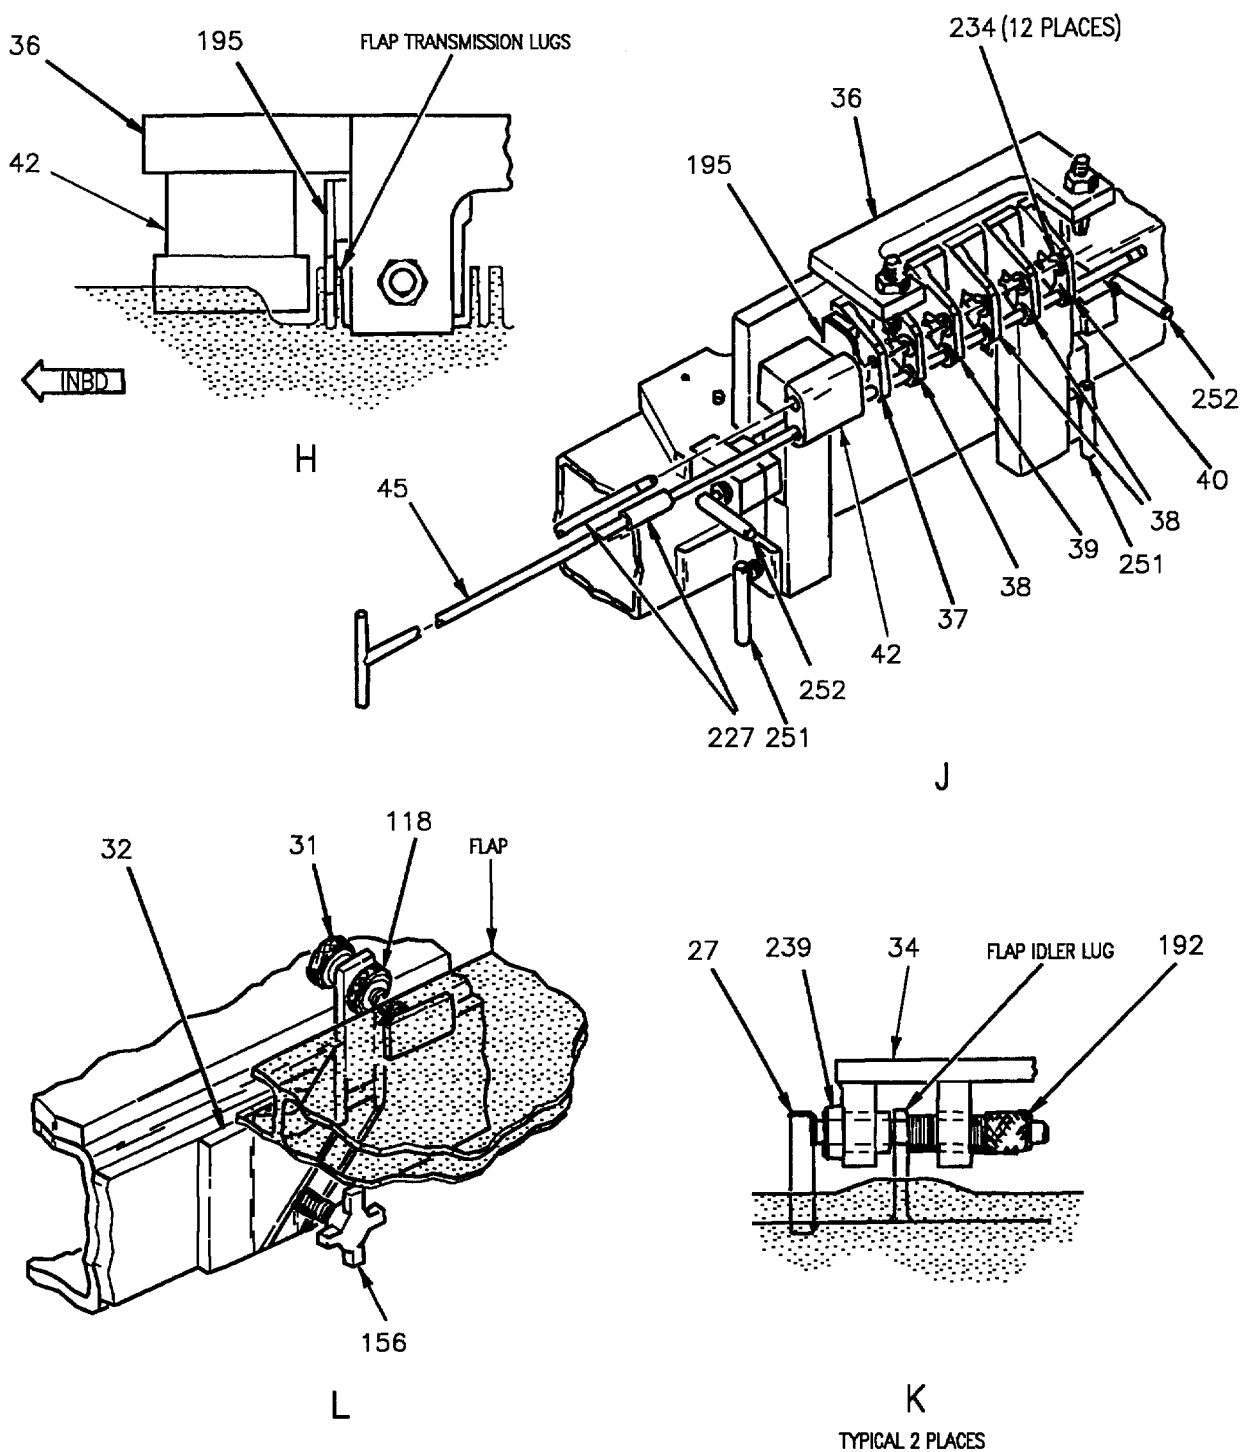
Installation of Flap with Undamaged Bushings into Fixture (Sheet 6)
